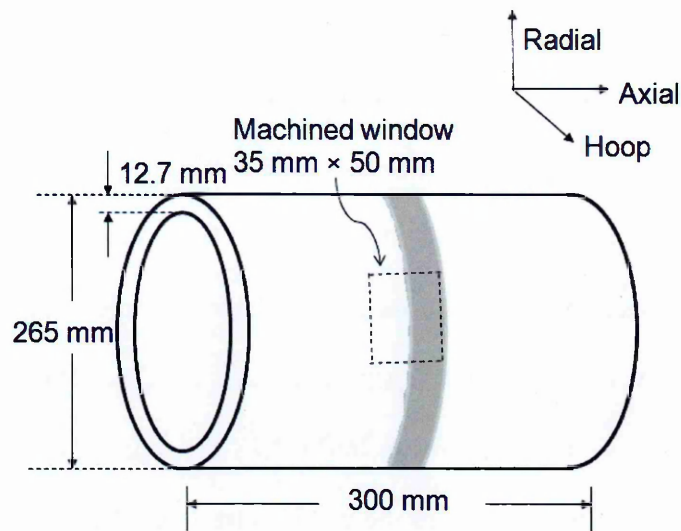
Schematic illustrating the location of the machined window in the half inch thick girth weld.
